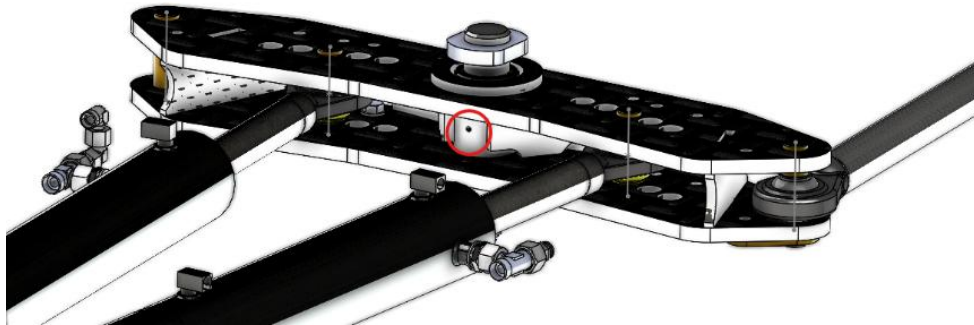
Grease point on the tilting mechanism of a Peecon hydraulic steering system with two axles.
